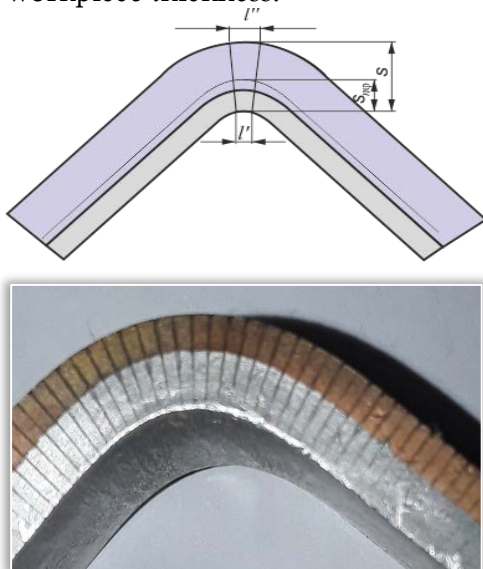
Geometrical size of the position and spacing of the parallel lines applied to the lateral surface and their position after the deformation of the Cu–Al Line on the surface of the piece and the workpiece at the bending of the two – layer laminar composite (layered material), Figure 4.
